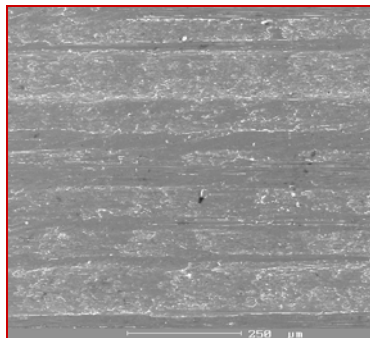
The machined surface morphology - the cutting tool HSCo, 8 % Co, TiAlN mag. 90x, $v_c=50$ m/min, $f=0,08$ mm, steel Cr20Ni8Ti
